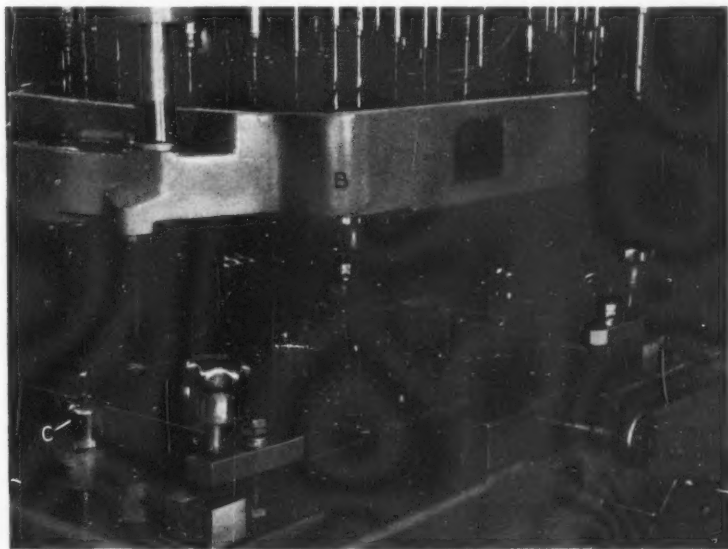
Close-up view of the jig, with a casting in position, on the Natco multi-spindle drilling machine
